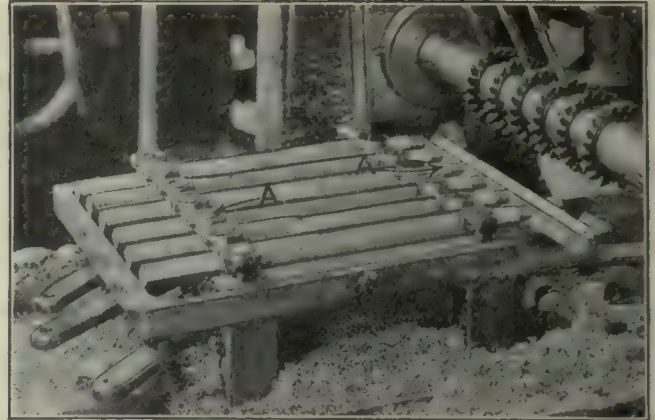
CUTTING KEYWAYS IN SIX SHAFTS AT ONE SETTING
